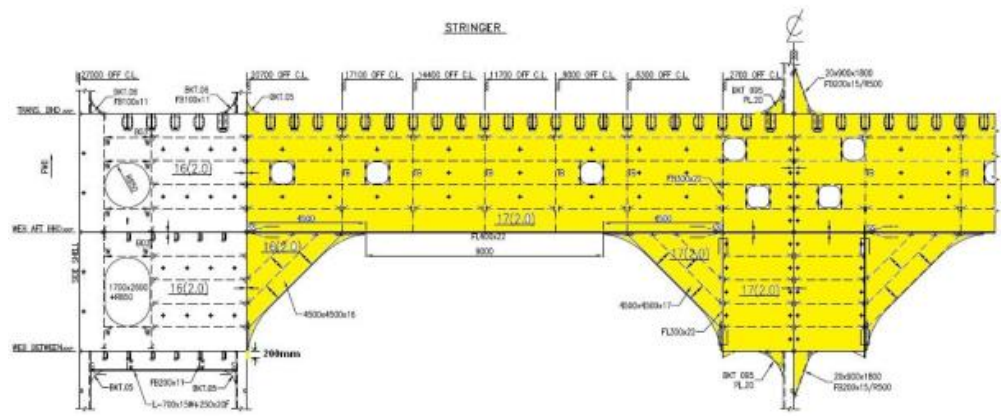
Transverse bulkheads (horizontal stringers & brackets) – Top view
